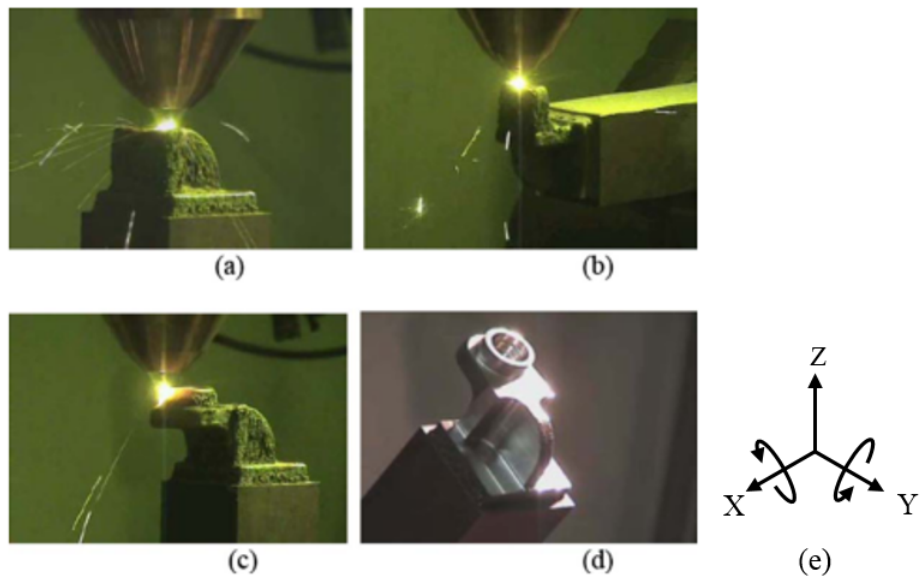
(a) Laser Aided Manufacturing Process. (b) & (c) The part can move in 5-axes allowing the overhang to be unsupported. (d) Part post-processed with CNC milling. The hybrid process makes fully dense metal parts for final use. (e) The build plate is able to rotate around the X & Y axes. From [133].
